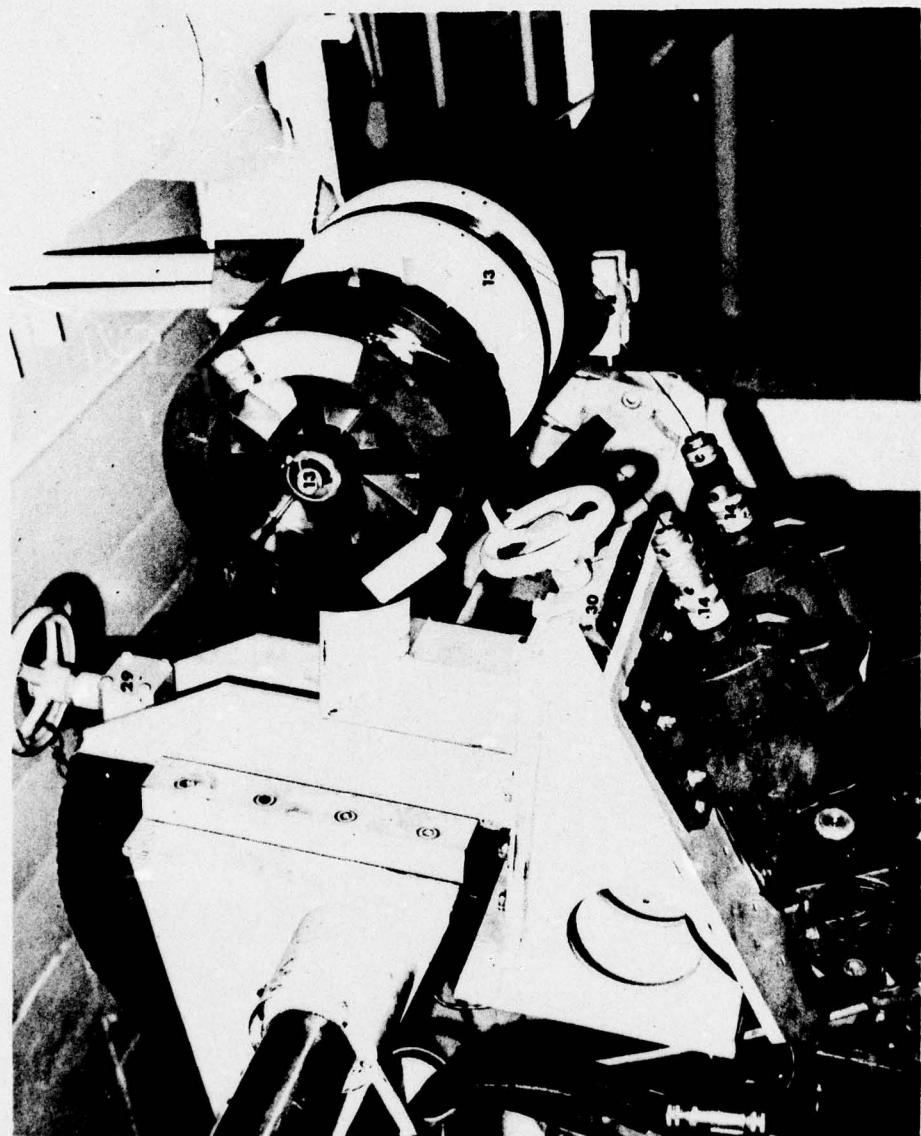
Heavy Duty Slides for Vertical and Horizontal Adjustment of Welding Equipment.
